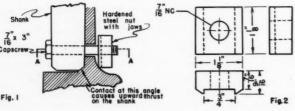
(Left) This shows the hardened steel nuts, as used on the original equipment, for gripping the coulter-bearing casting. Note how the uneven support of the lower nut on the coulter shank caused bending and eventually failure in the capscrew • Fig. 2 (Right)
